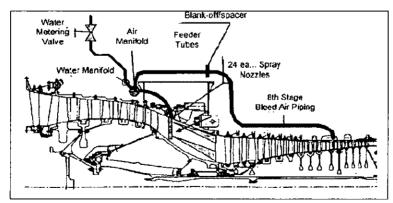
Half Section View of LM6000 Gas Turbine Compressor Section<sup>3</sup>
